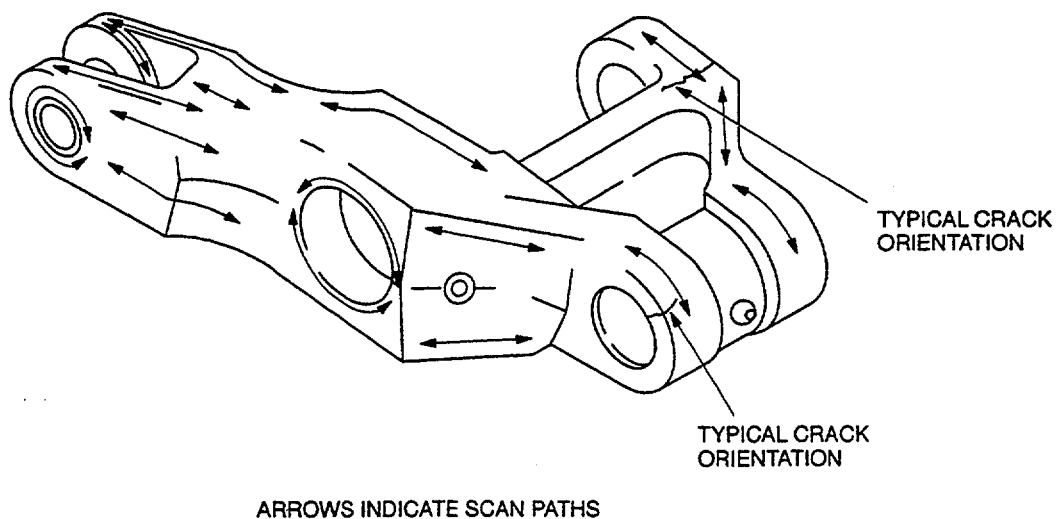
Scissors Assembly (Scissors and Sleeve Assembly)
